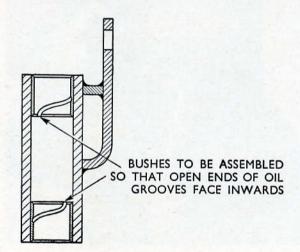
Sectioned view of relay lever housing, showing assembled position of bushes
